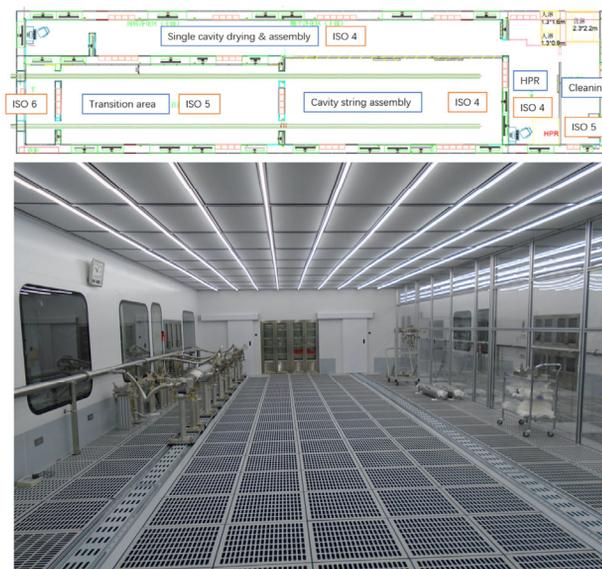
ISO 4 class cleanroom for cavity string assembly.
